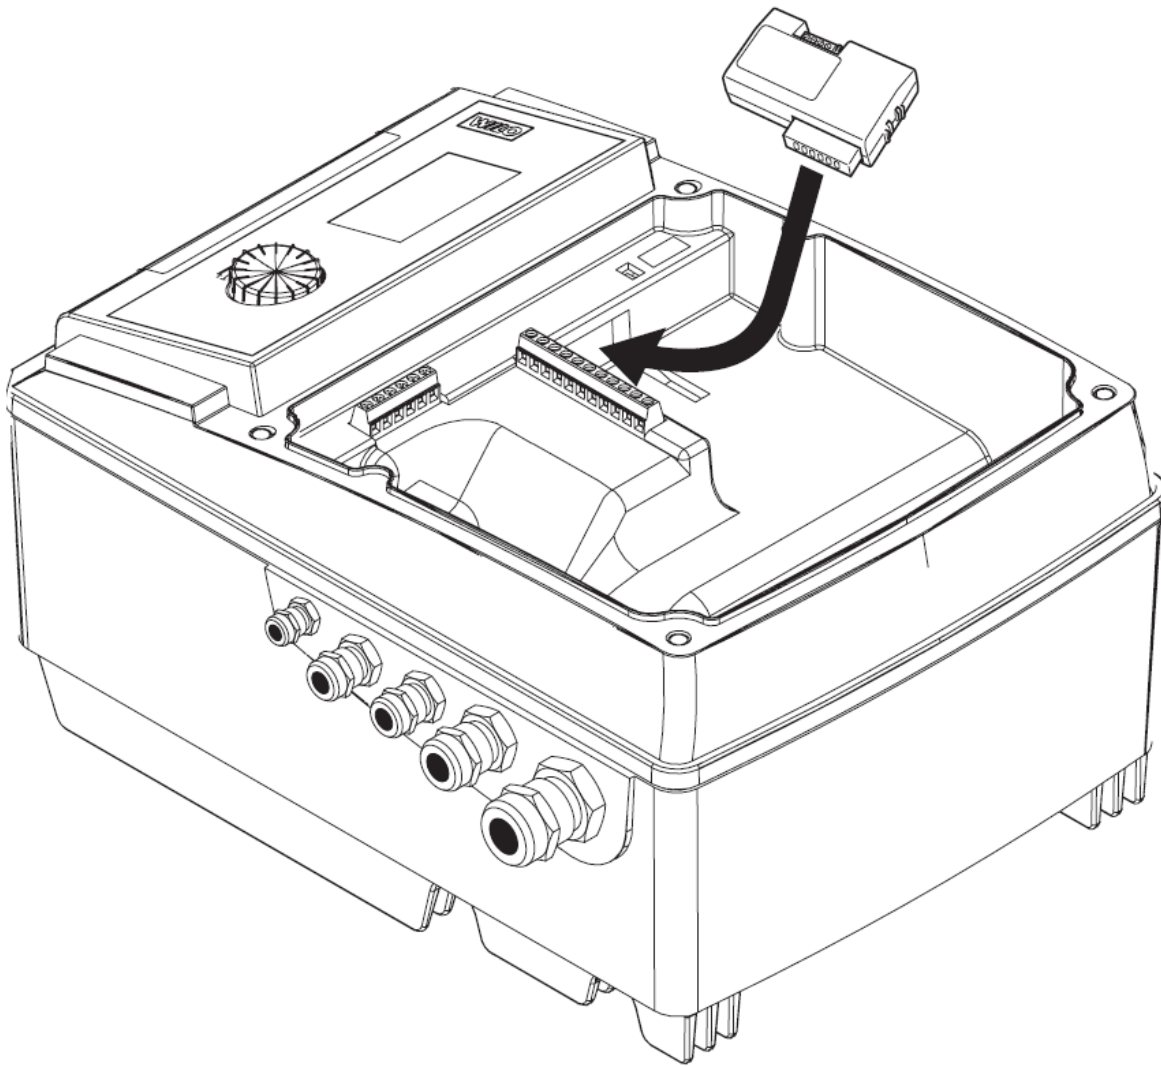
Mounting of IF-Module for pumps 5...7.5 kW
